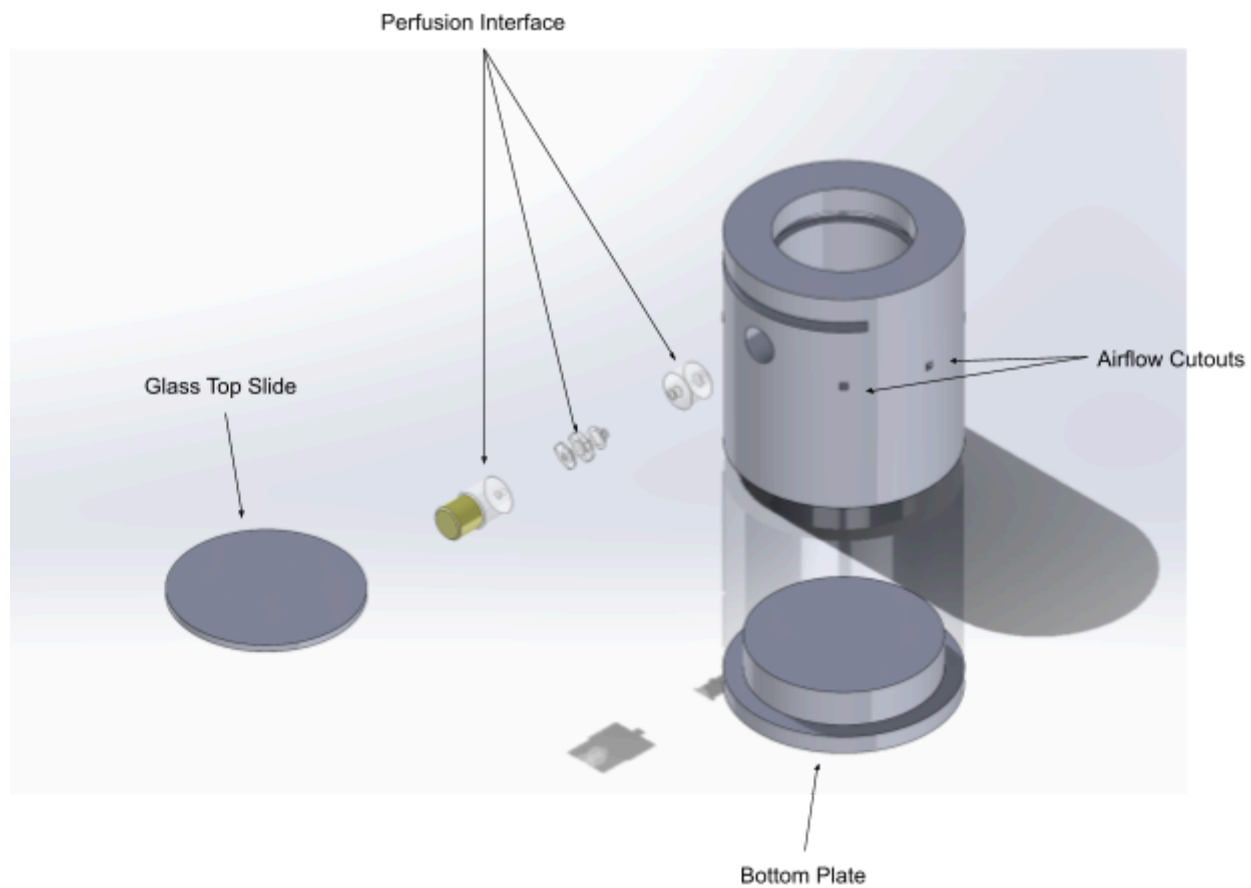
Shows a CAD model in exploded view of the entire design including the housing and outer chamber (contains perfusion system)
